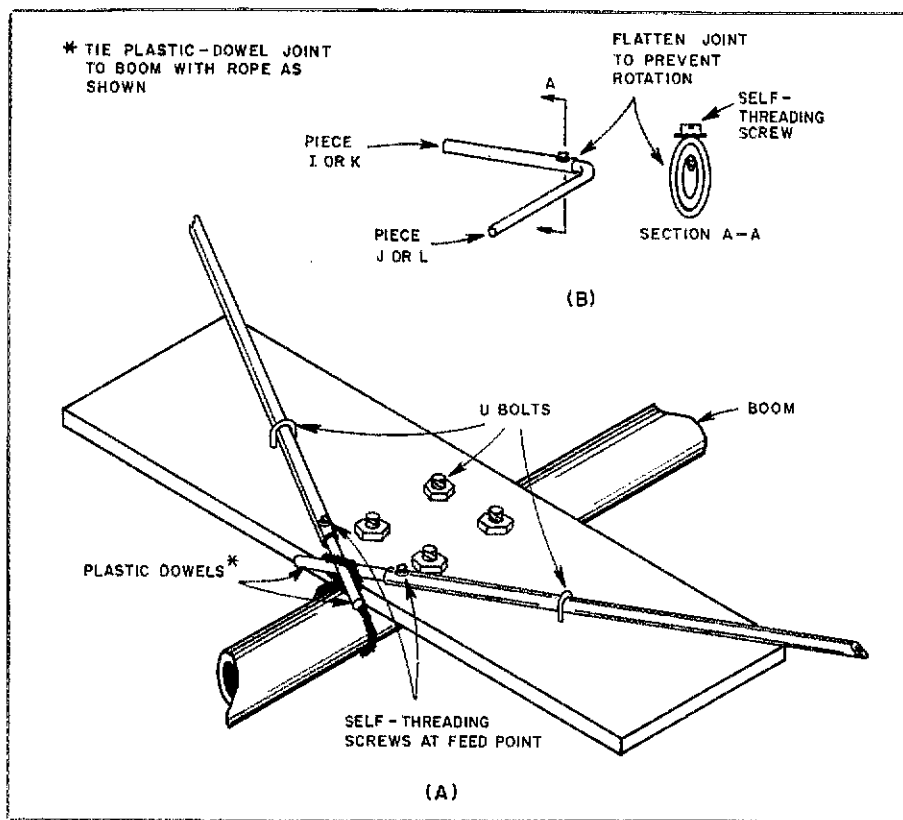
Details of the mounting-plate assembly (A) and element joint (B). Flatten the joint slightly after assembly to prevent rotation.
